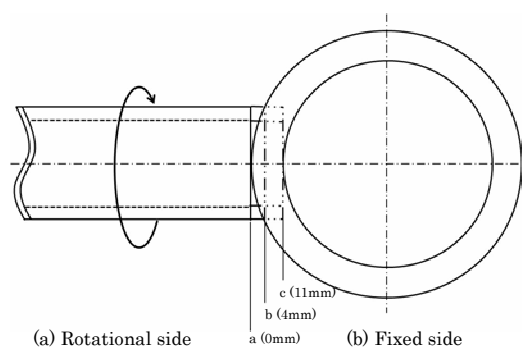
Relation between branch pipe and main pipe friction welding specimen.
